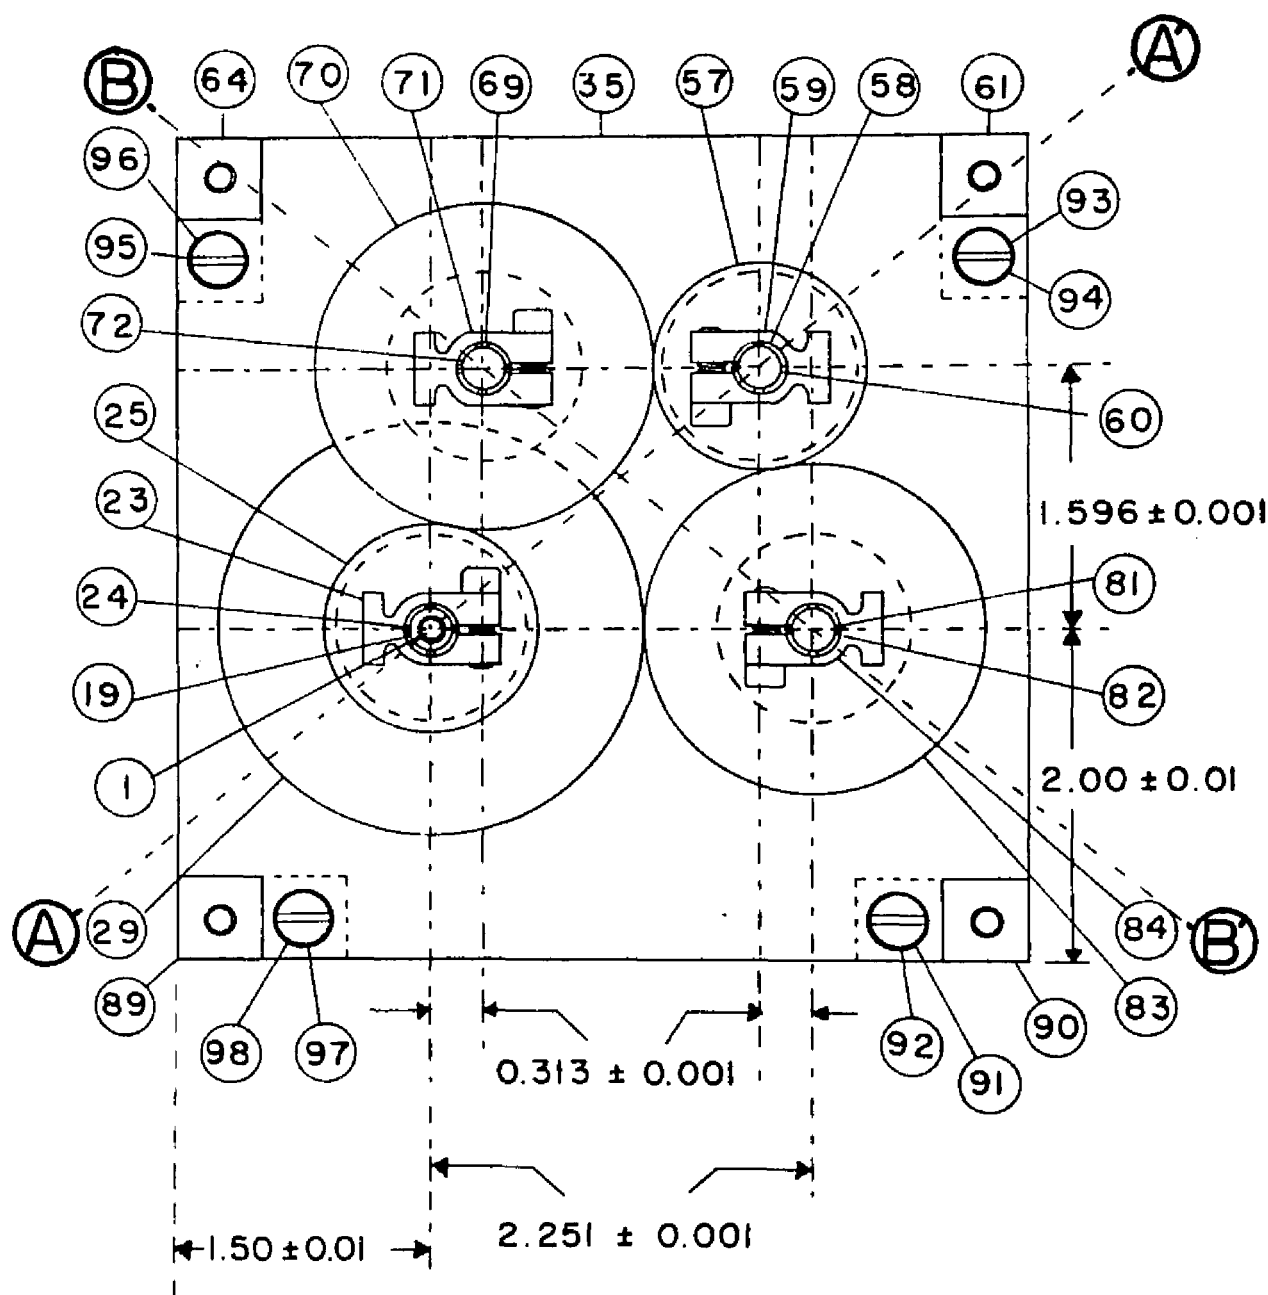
Top view of theta, two-theta goniometer, with upper bearing plate removed, showing shafts and spacer posts in cross-section, plus gears (teeth not shown) and lower bearing plate. Logitudinal sections AA' and BB' are shown in Figures 2 and 3, respectively.
